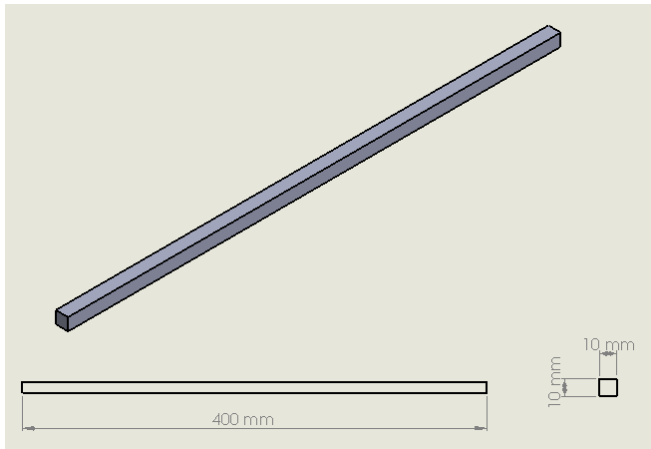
Geometry and dimensions of cemented carbide by SolidWorks program
